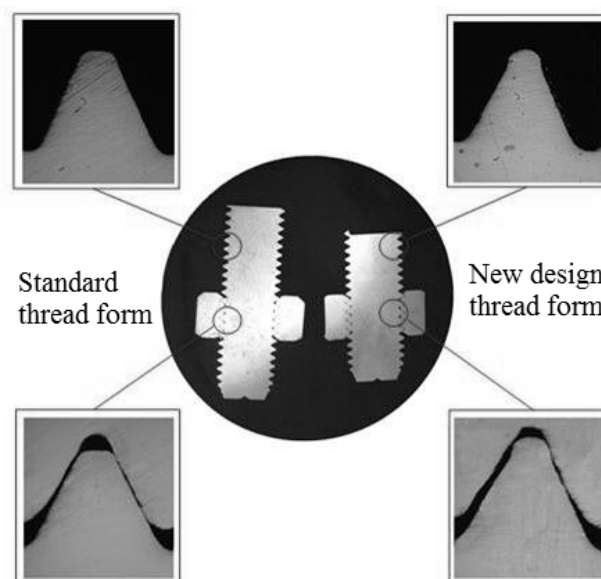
Thread forms of standard and new produced bolts, respectively
